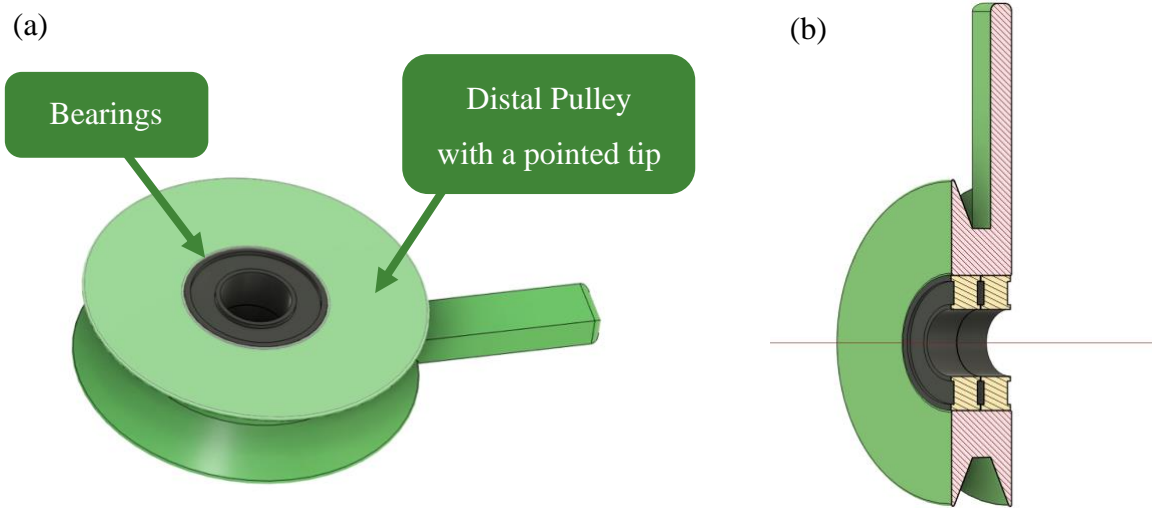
3 (a) Distal Pulley with a pointed tip & Bearings (b) Cross-sectional view of distal pulley and bearings
